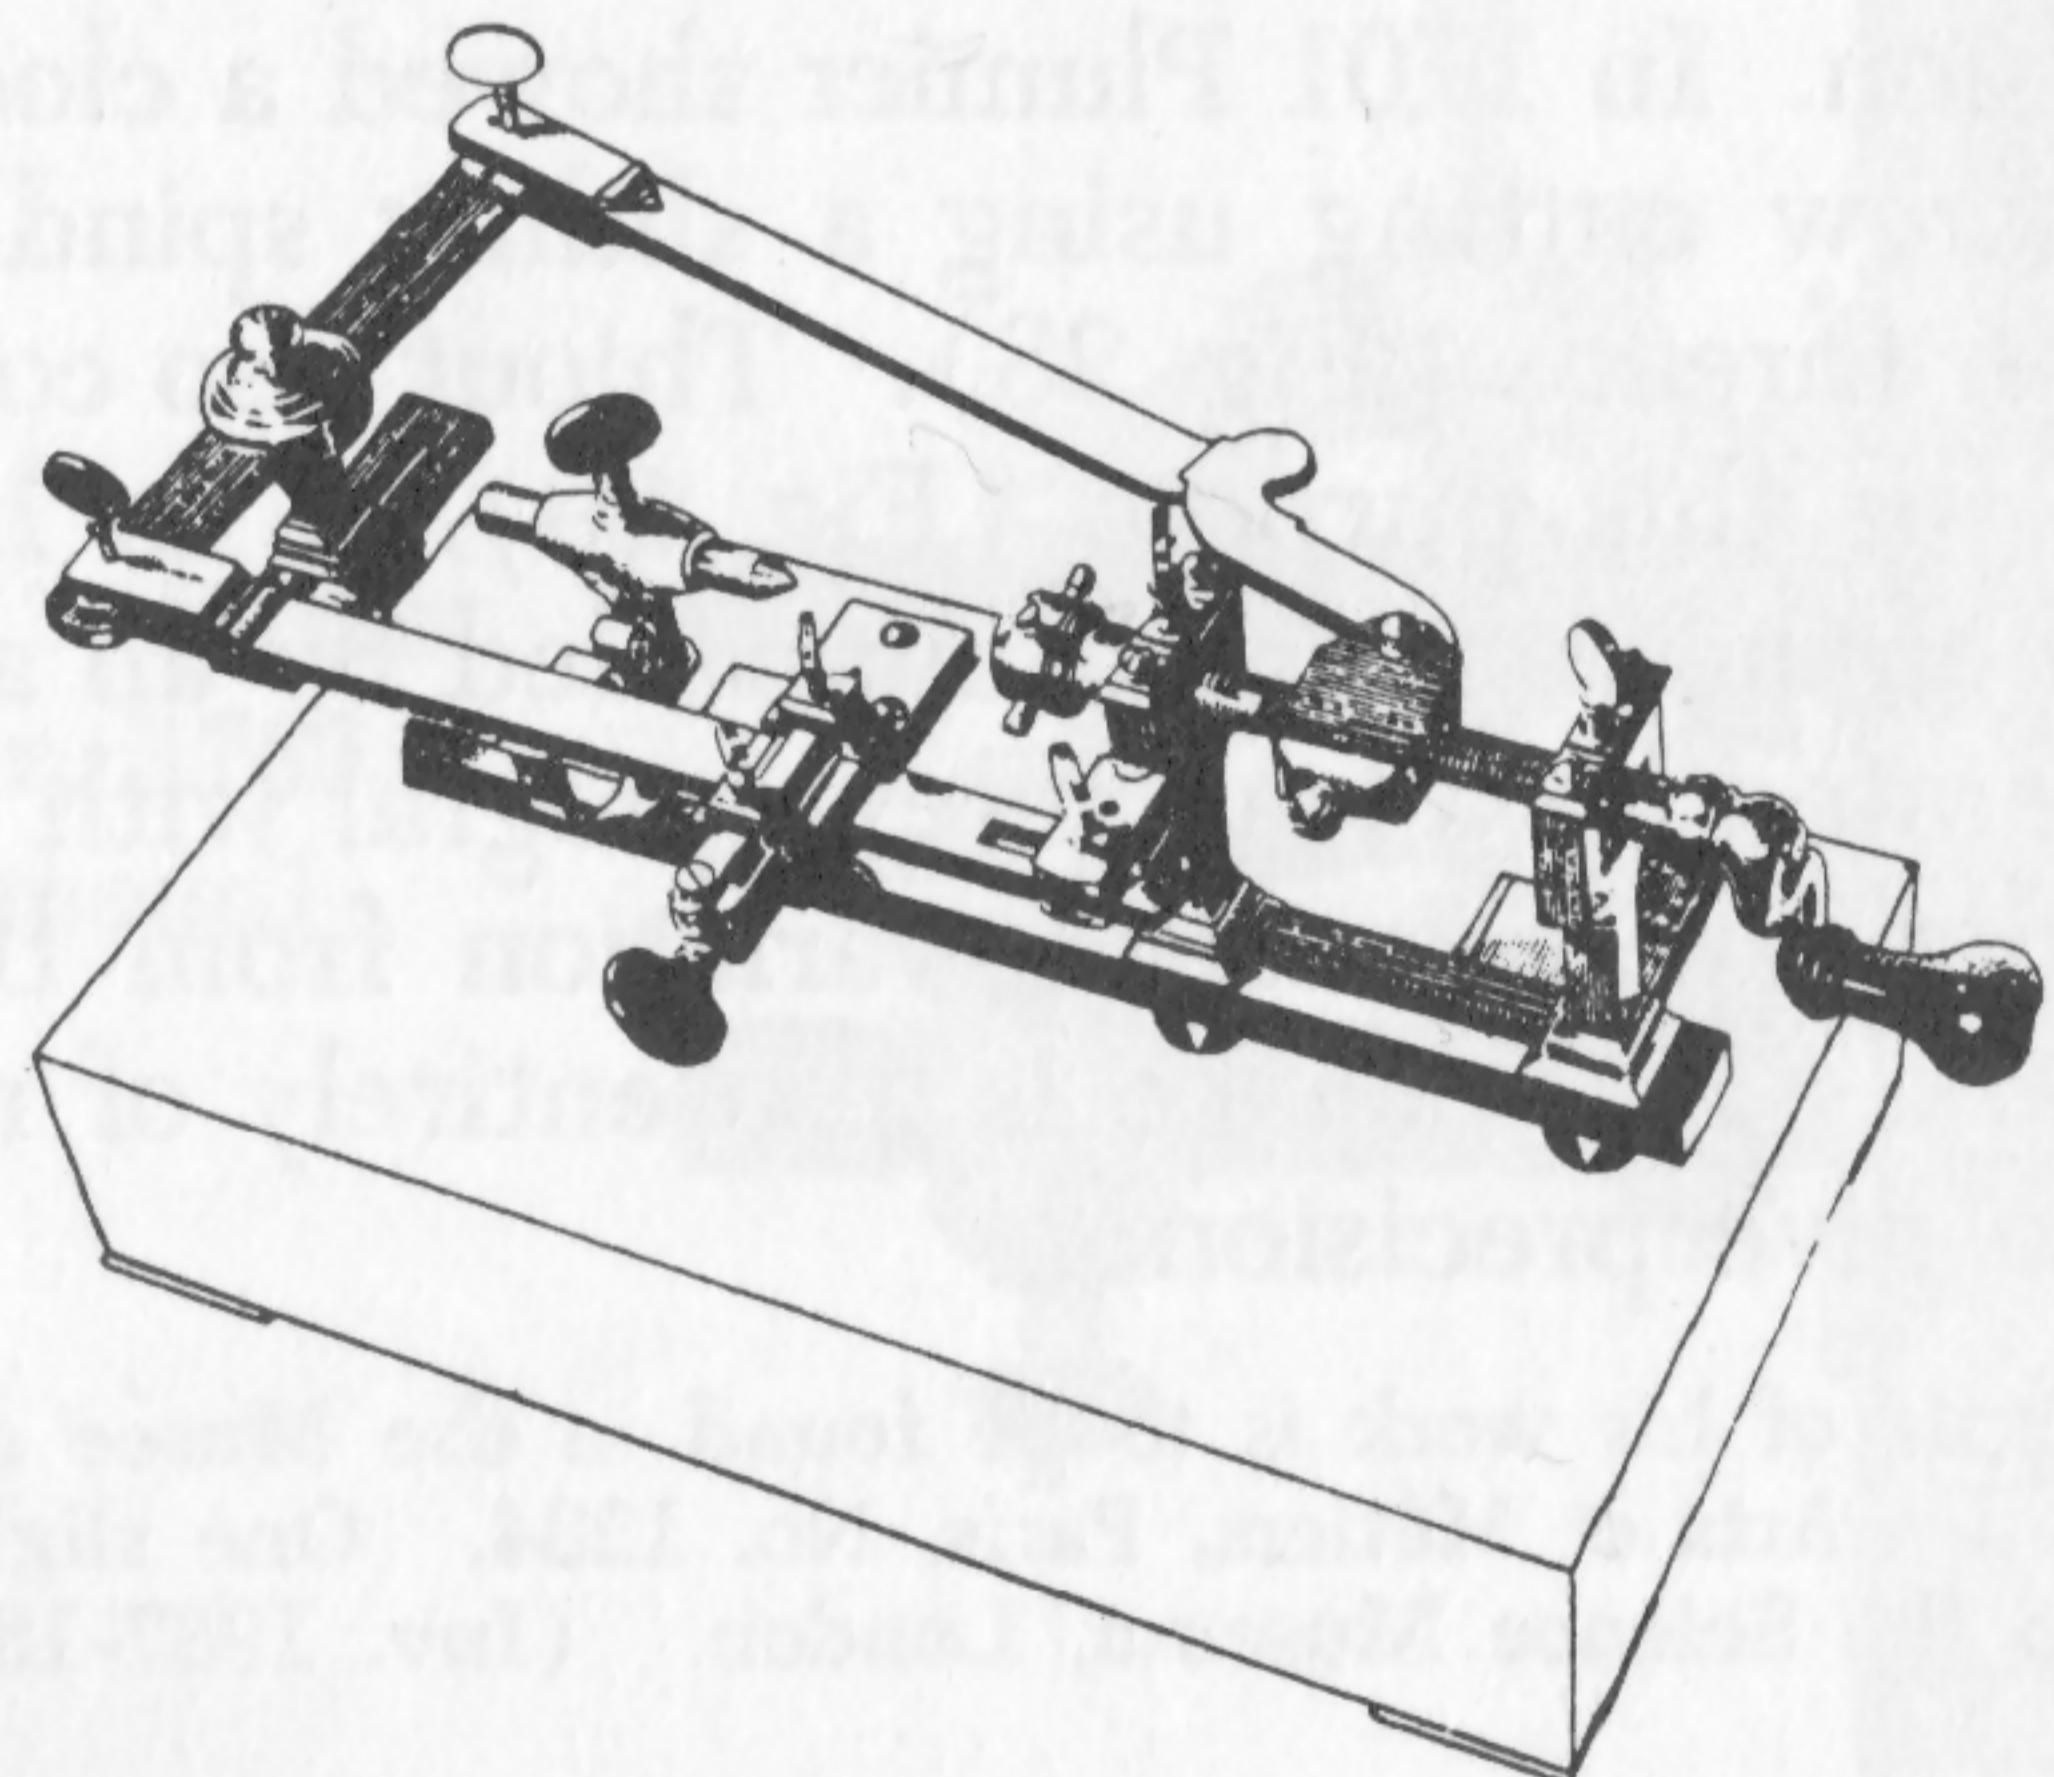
THIOT'S SCREW-CUTTING LATHE
